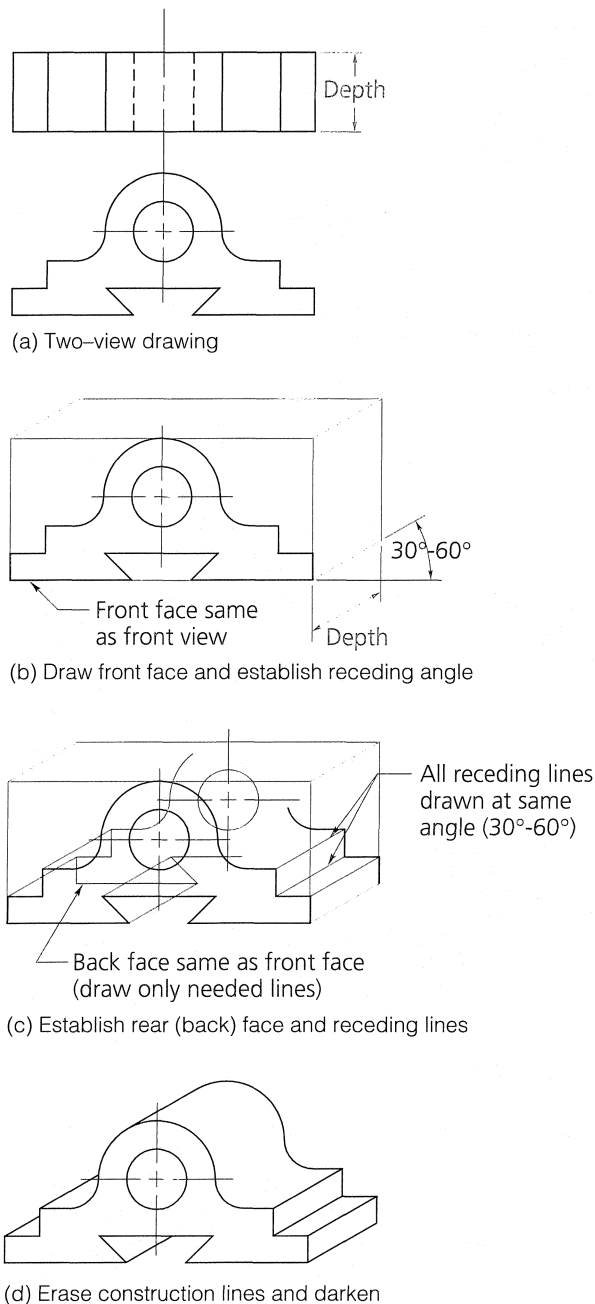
Step-by-Step Construction of Oblique Drawing
